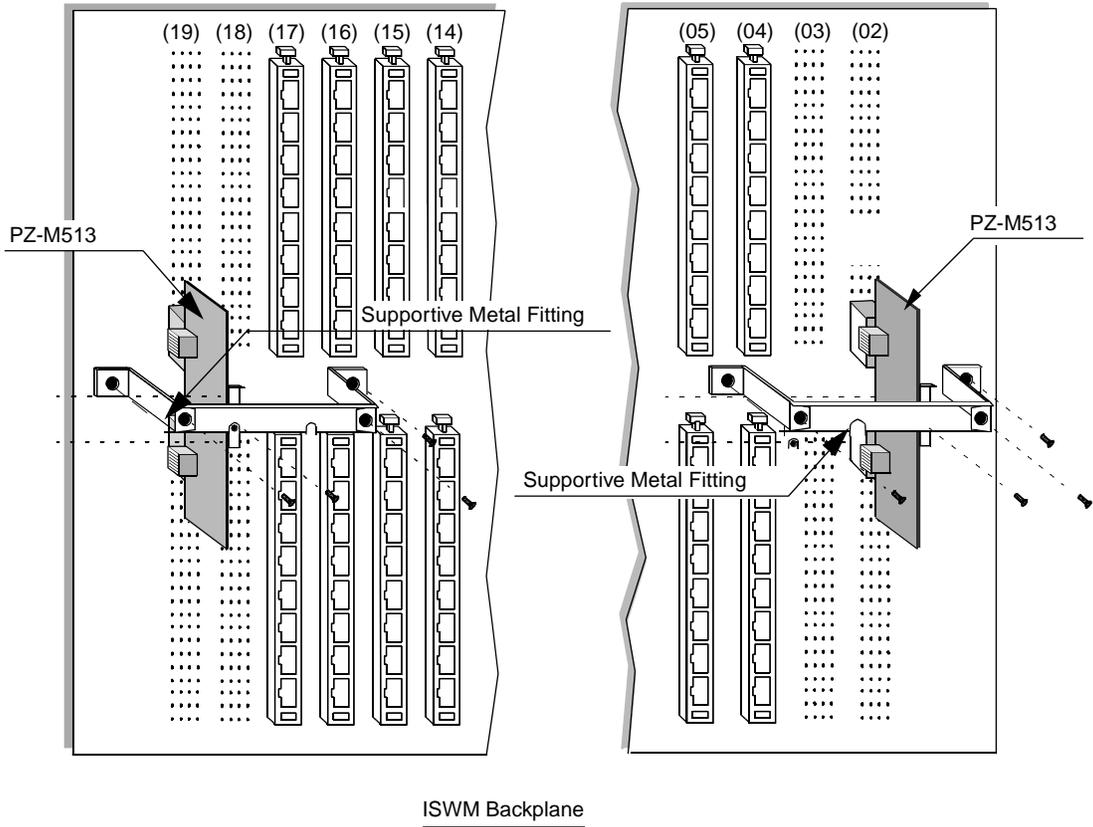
Details on Fastening PZ-M513 by Metal Fittings (ISWM Backplane)
